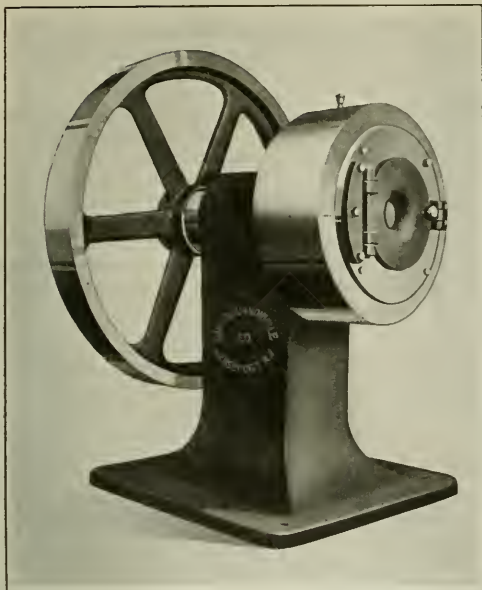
Rotary Swaging Machine with Ten or More Rolls in the Head
